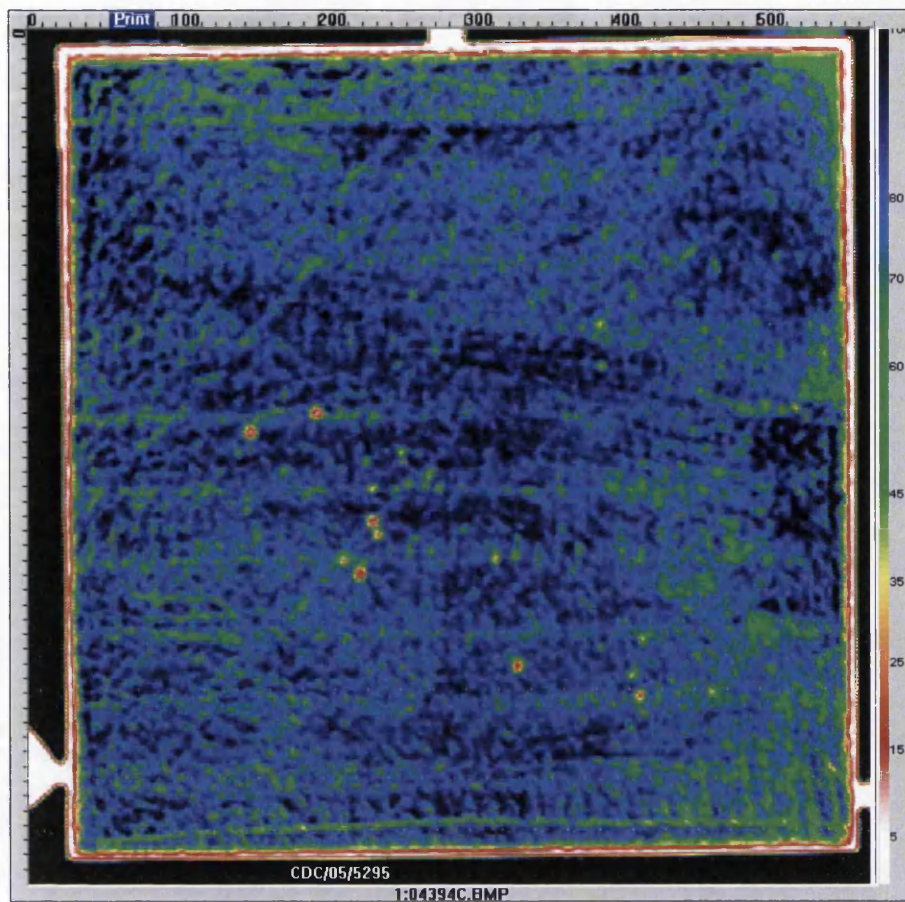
CDC/05/5295 was used to manufacture quasi-isotropic open hole tension coupons.
